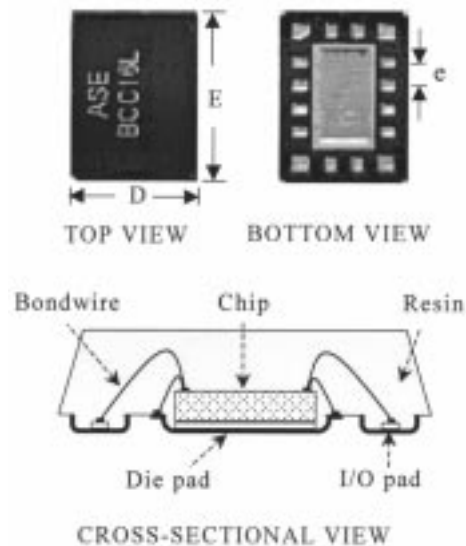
Top, bottom, and cross-sectional views of a 16-pad BCC<sup>++</sup> package.
